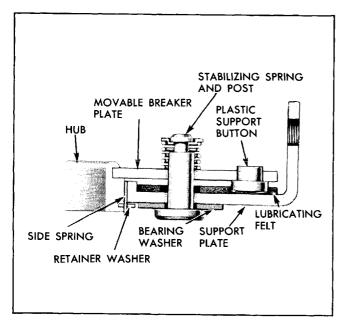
Vacuum Advance Breaker Plate Assembly—Cross Section
